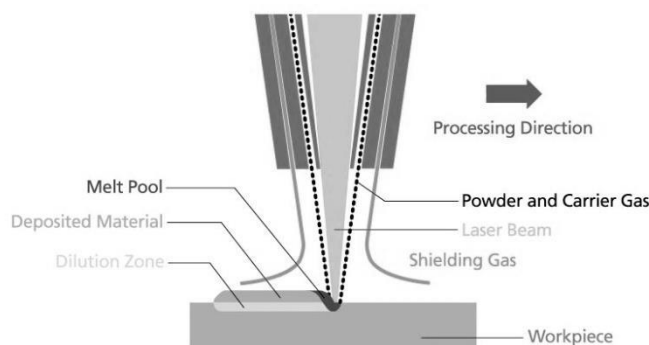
Schematic illustration of laser welding [104].
